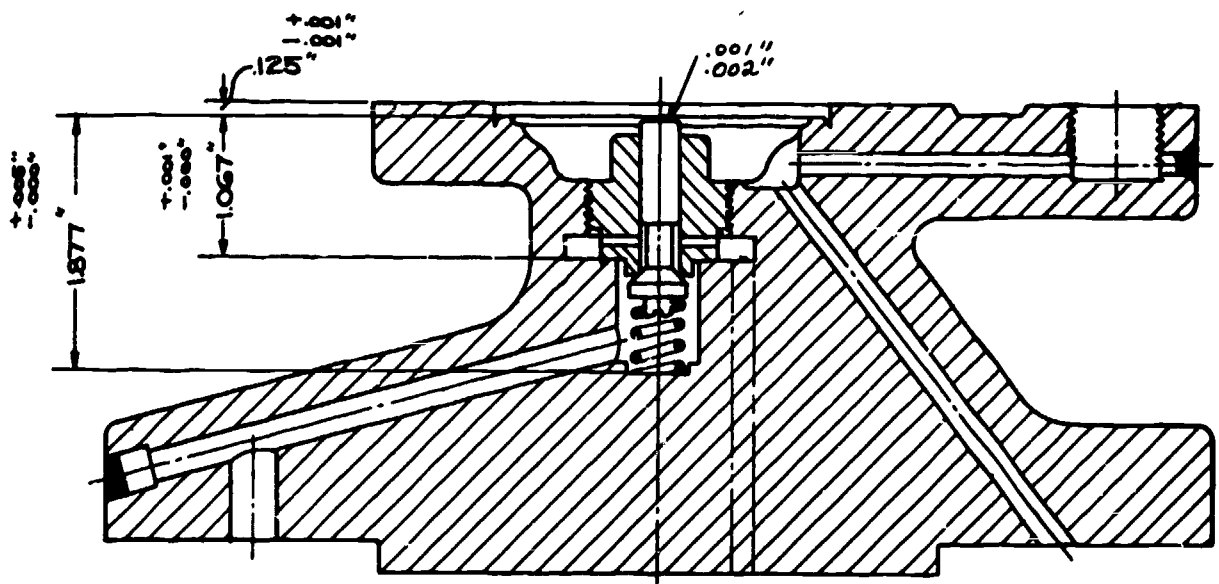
Important points in cleaning and reassembling a top cap assembly.
